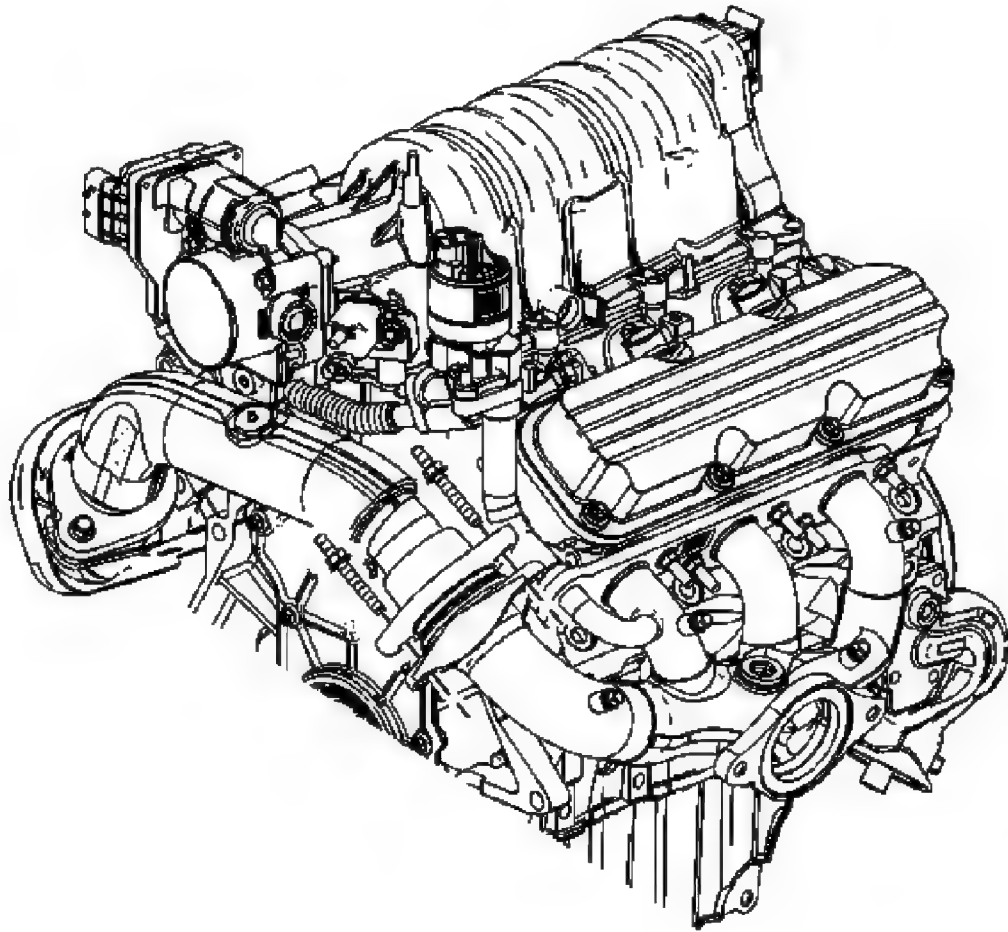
Removing/Installing Exhaust Crossover Pipe
